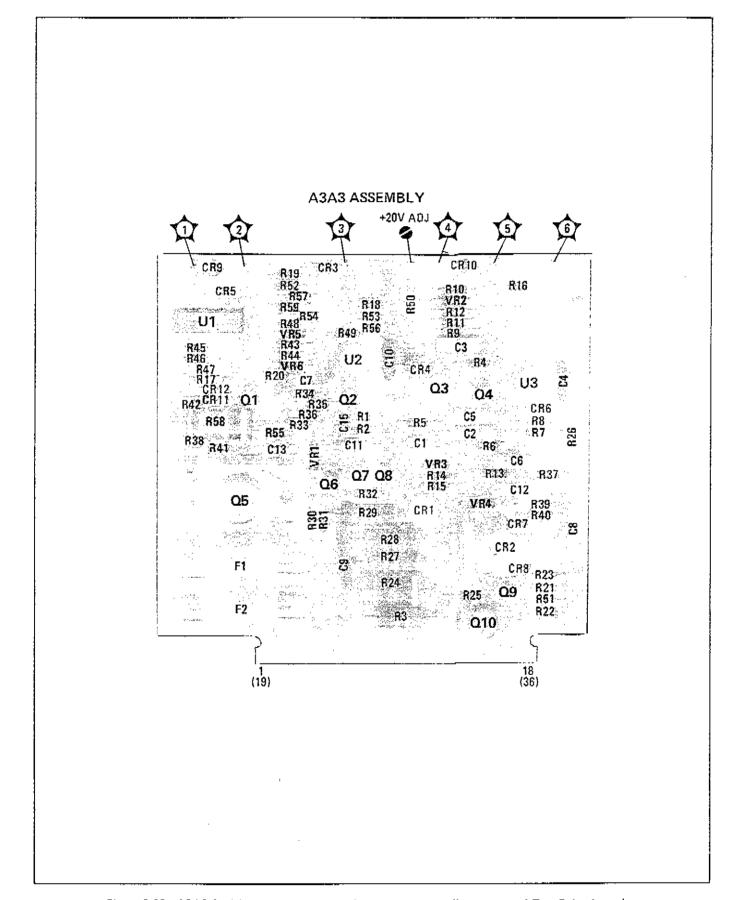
A3A3 Positive Regulator Assembly, Component, Adjustment, and Test Point Locations
